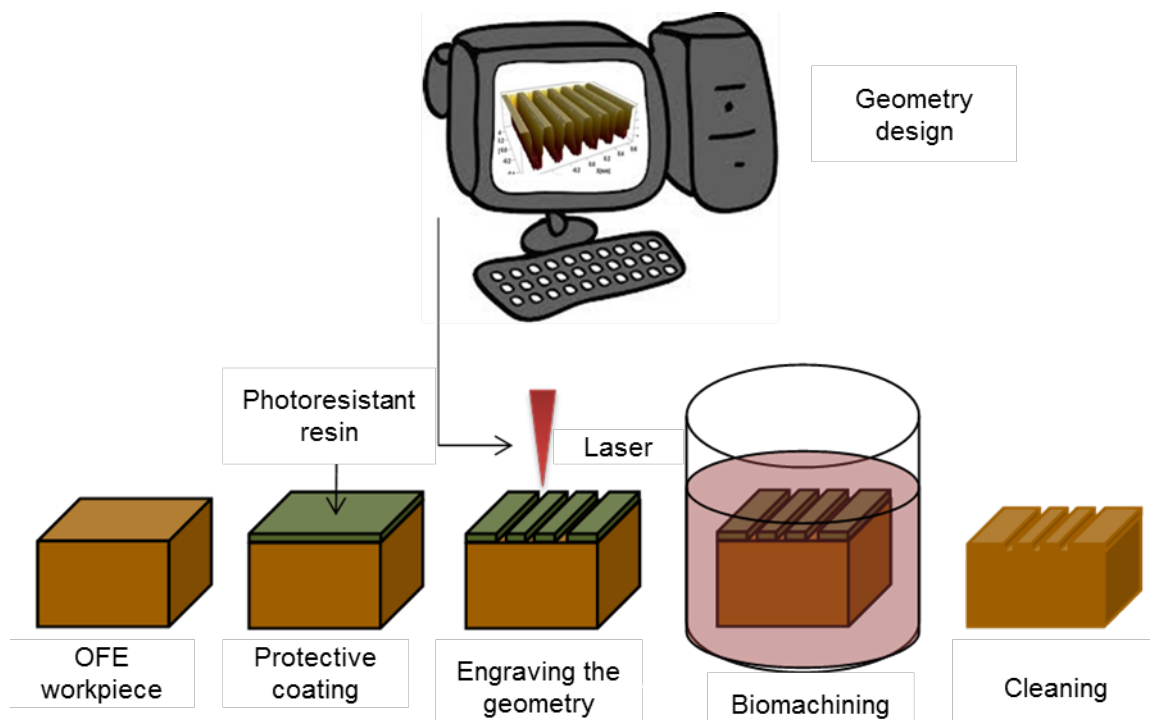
Engraving process of a geometry on a OFE workpiece combining laser processes and biomachining.
